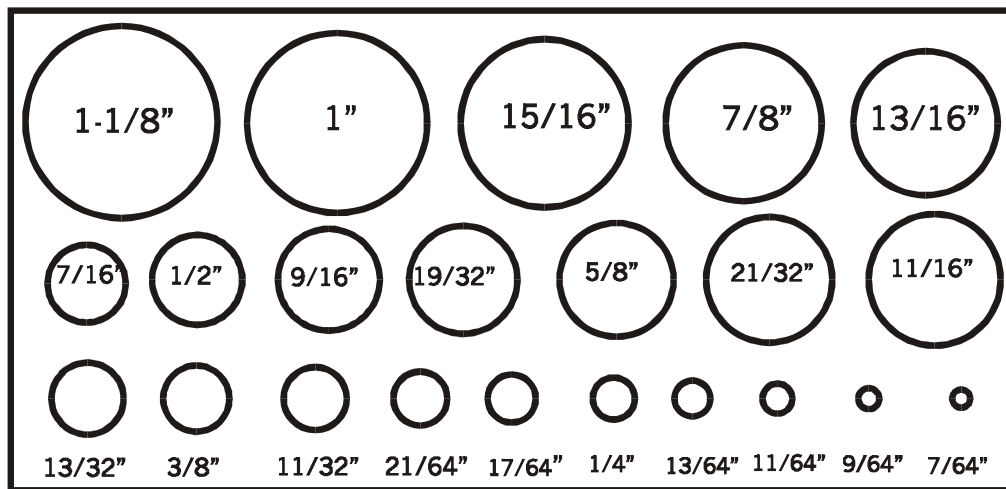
Dapping Block Die Dimensions. The dapping block dimensions are given in fractions of inches. This die block and the punches listed in Fig. 11.7 are the tools used to determine the final bead size.
